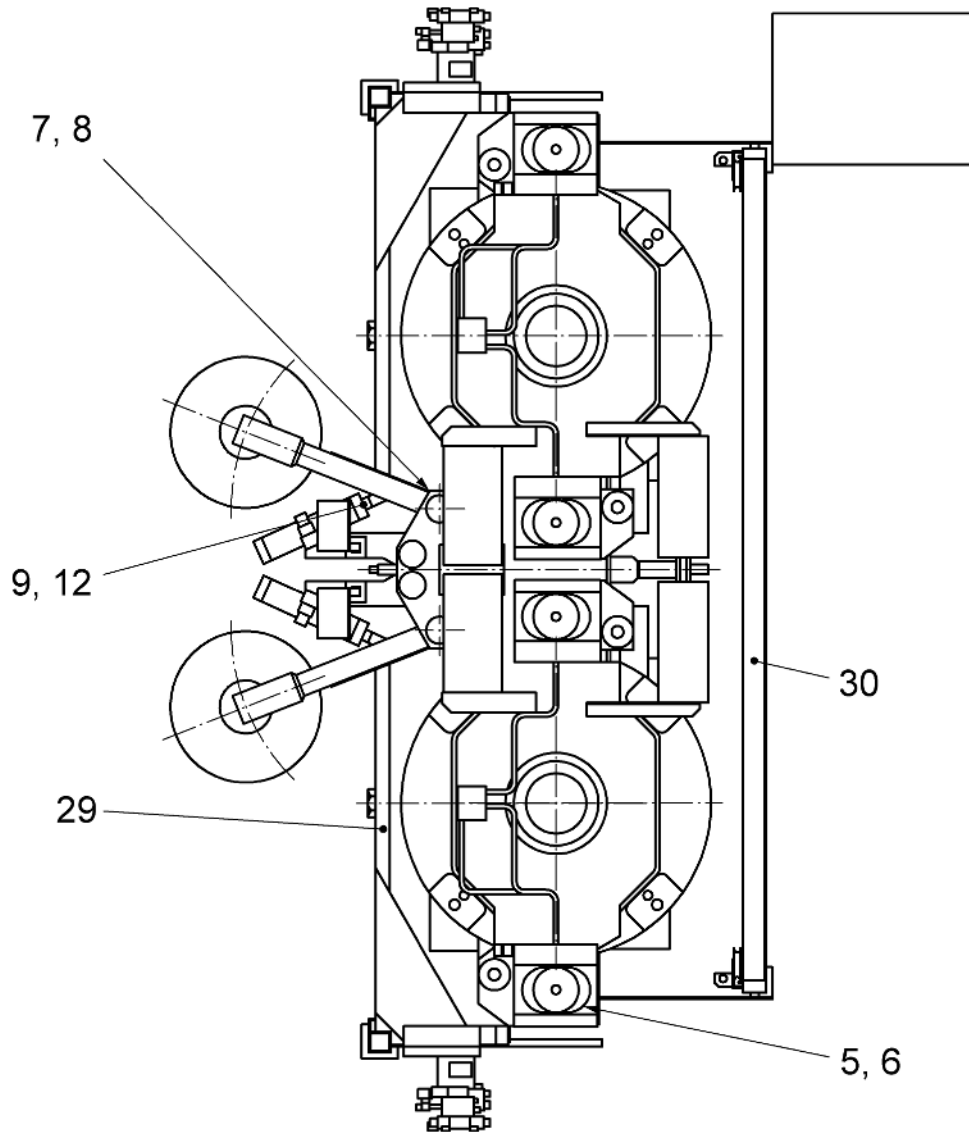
Location of hazards on tyre curing machines with automatic rear feeding and discharge (top view)
